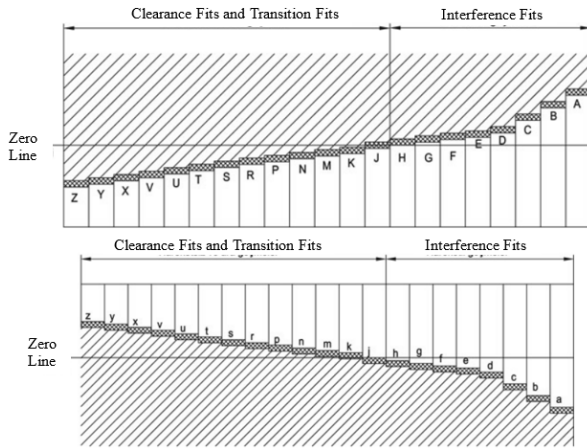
Classification of ISO tolerances designated for the shafts and holes [13]
